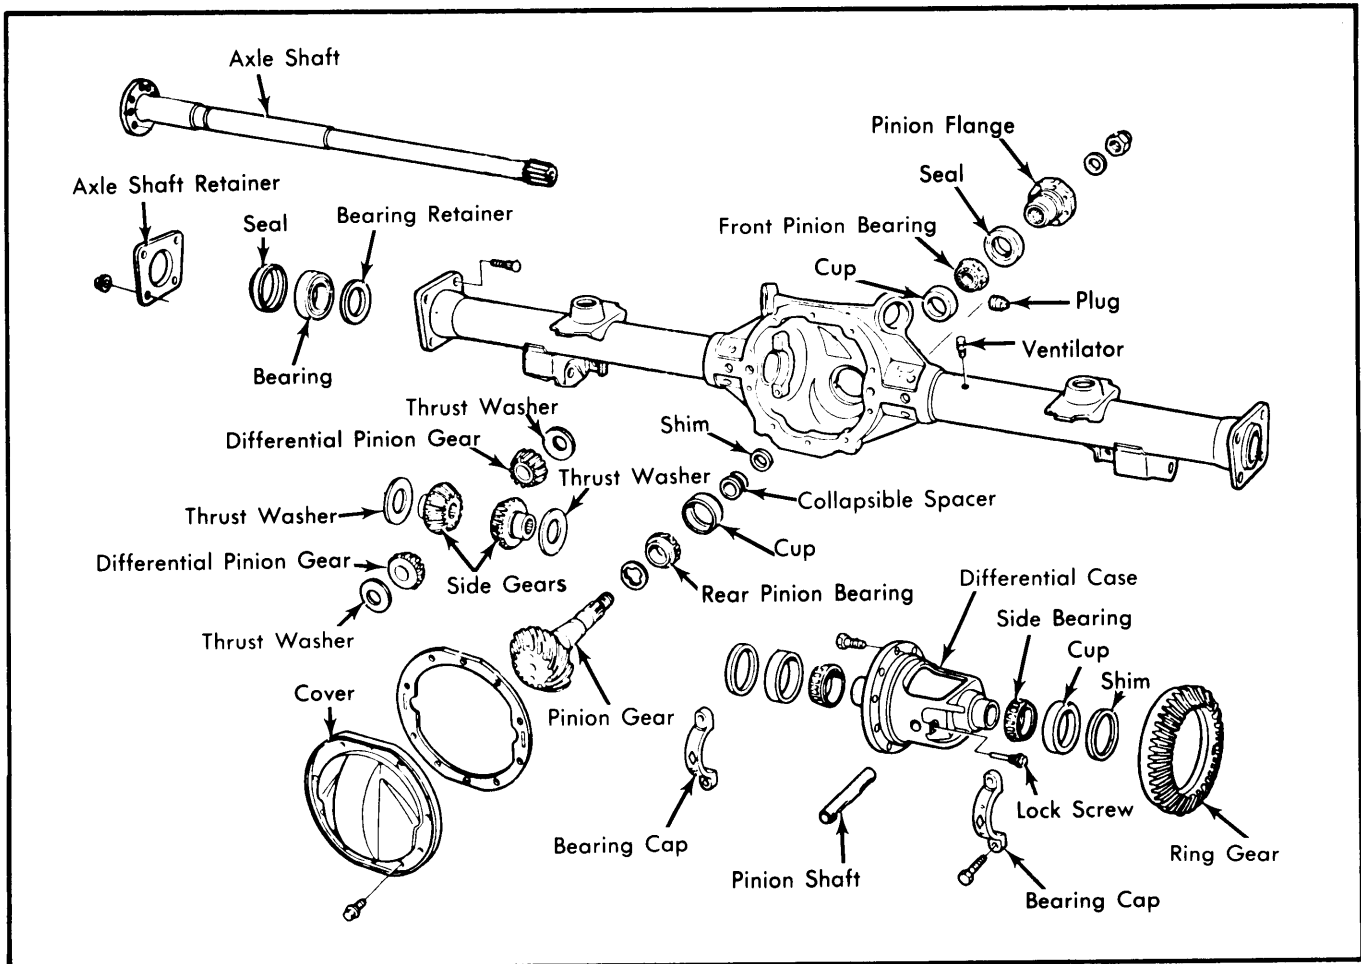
Exploded View of General Motors 8 1/2" and 8 7/8" Ring Gear Axle Assembly
